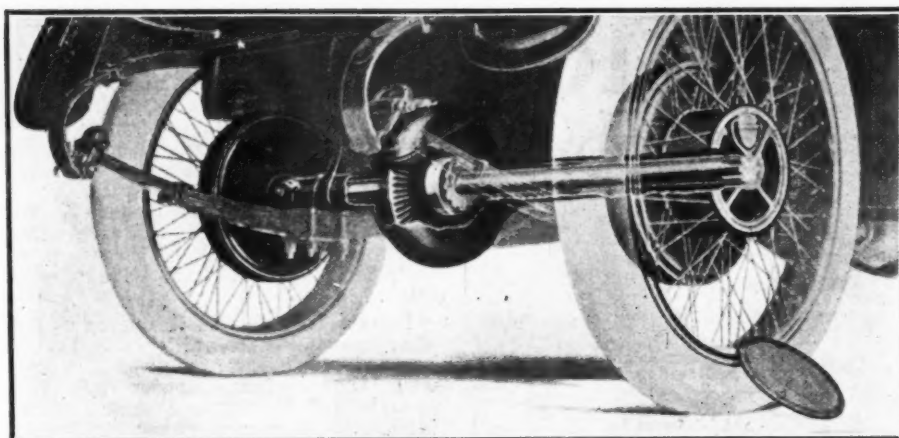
Luxmore gearless differential that operates by means of a roller clutch in each wheel hub. When rounding a corner the inner wheel drives, the outer one running free
